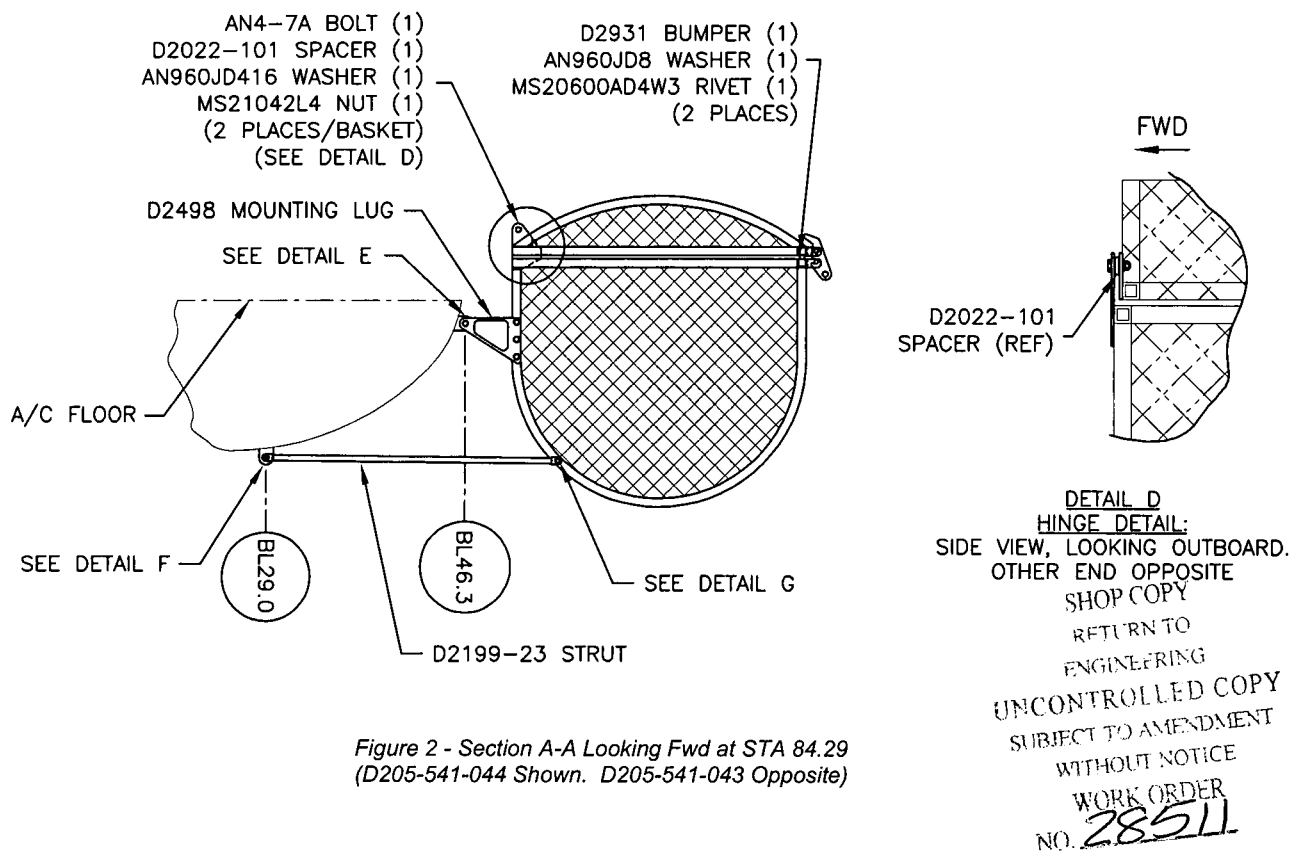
Section A-A Looking Fwd at STA 84.29
